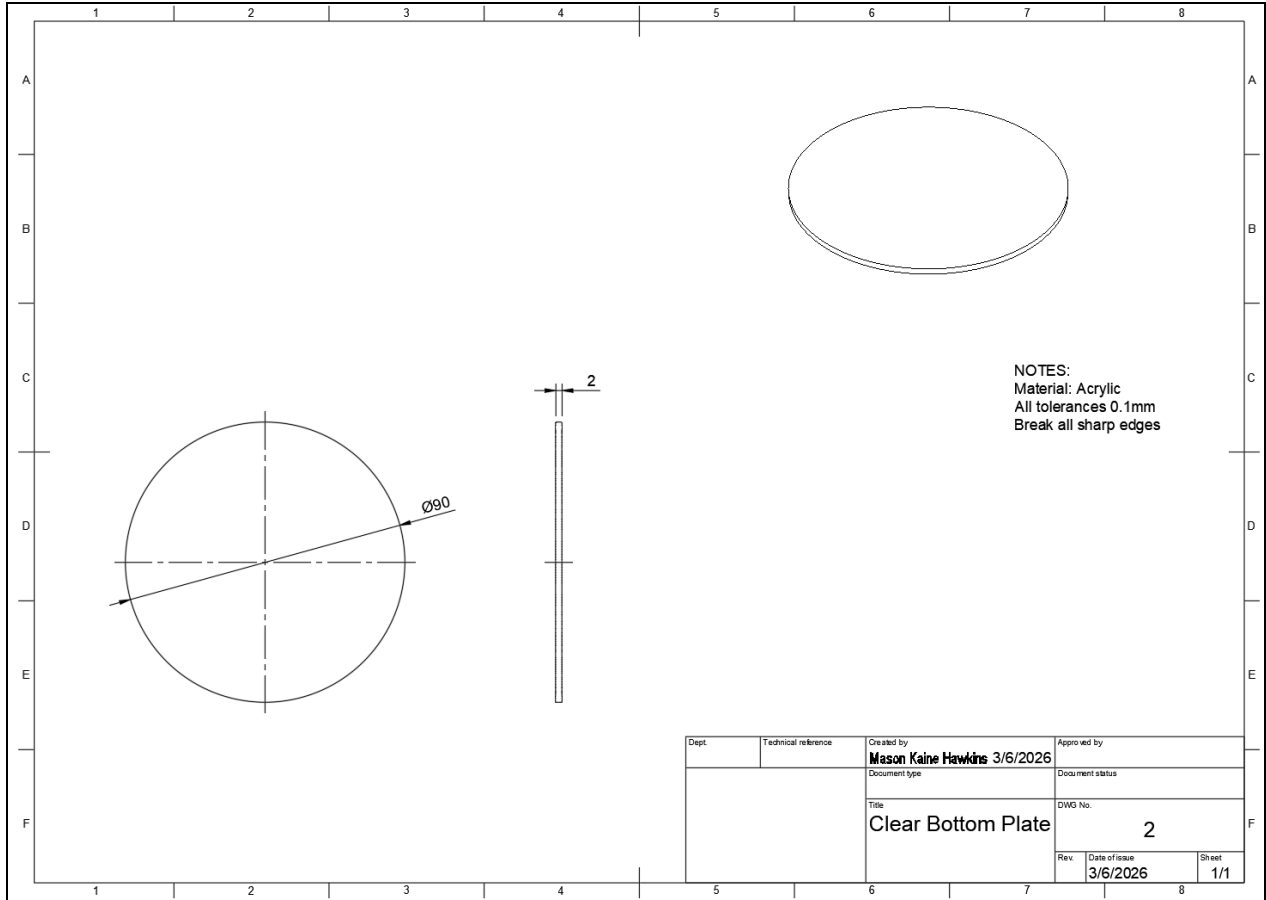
Clear Acrylic Bottom Plate Drawing
